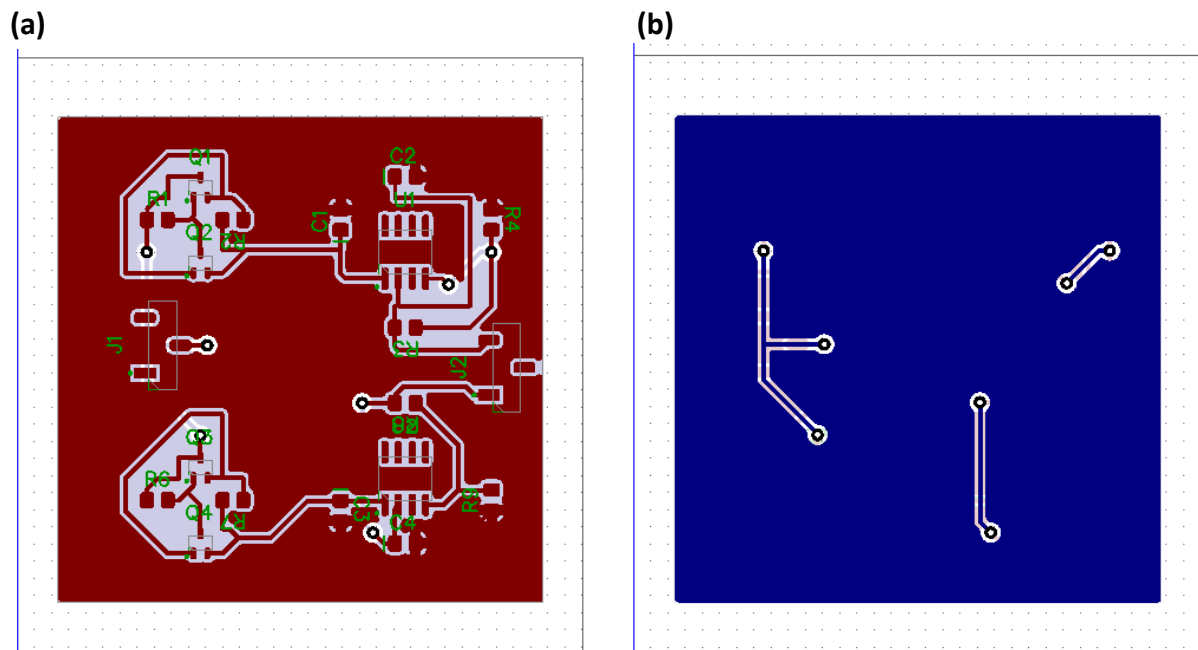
PCB Design of circuit 2 for (a) Top Side; (b) Bottom Side
